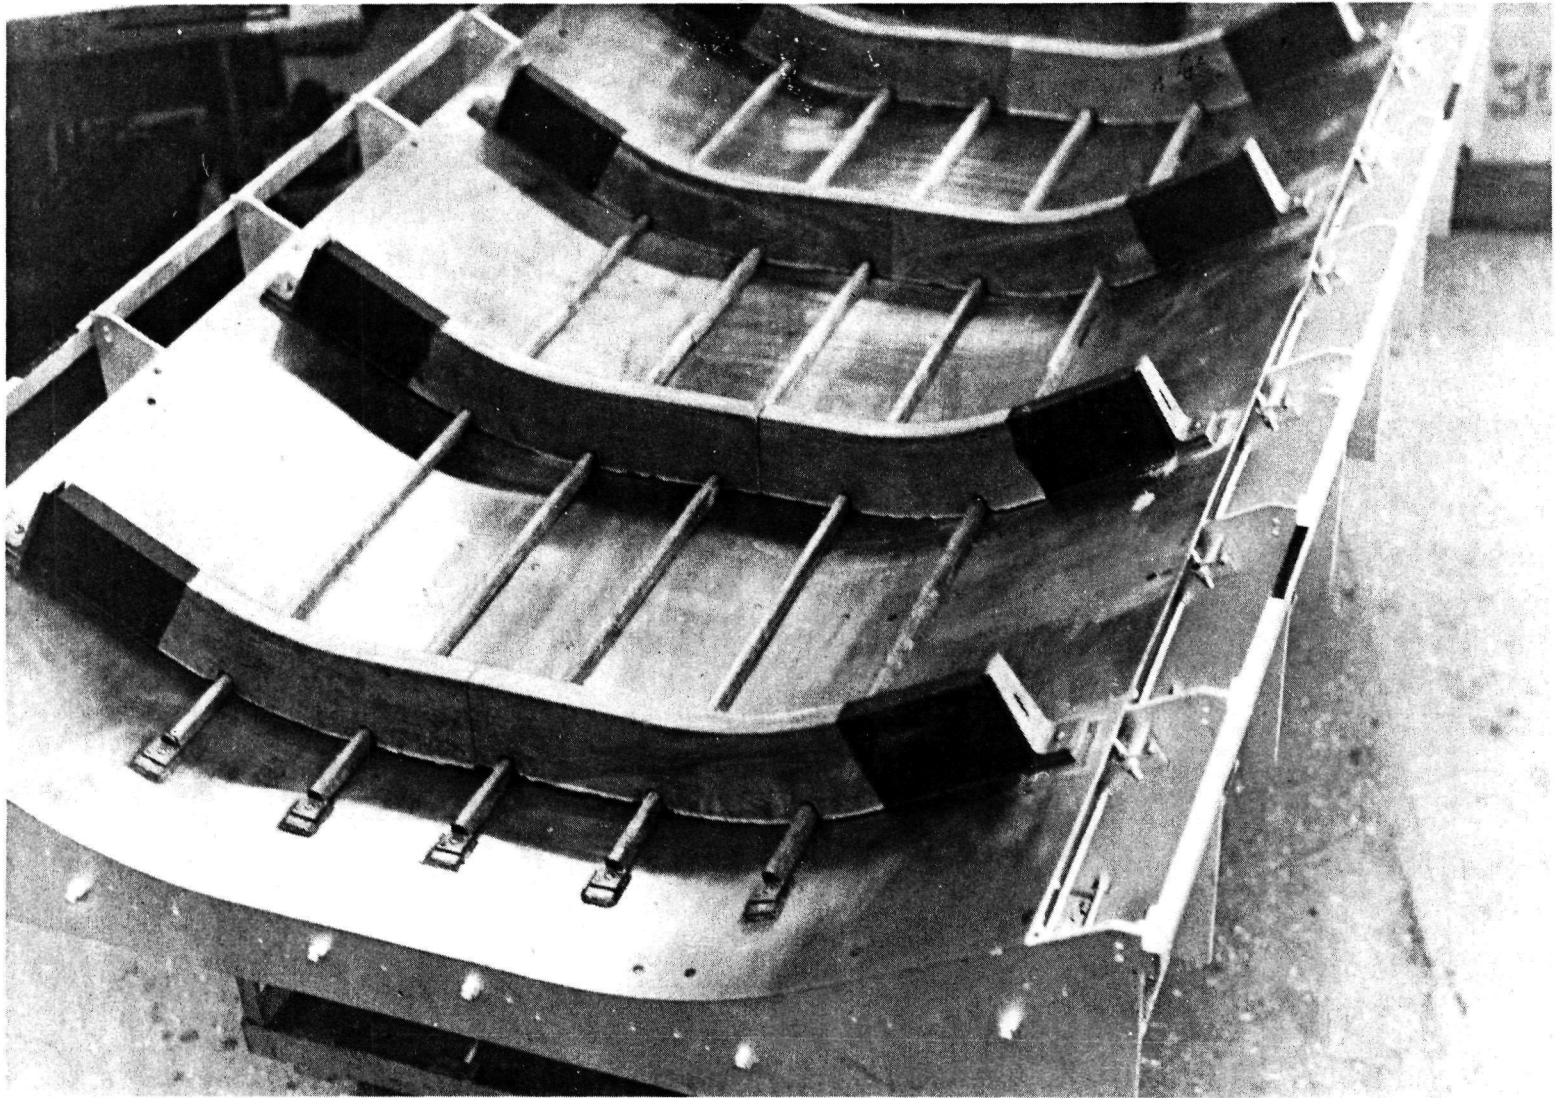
EWR 32381-T60 LAYUP TOOL WITH FOAM CORE FRAME AND STRINGER DETAILS IN POSITION.
